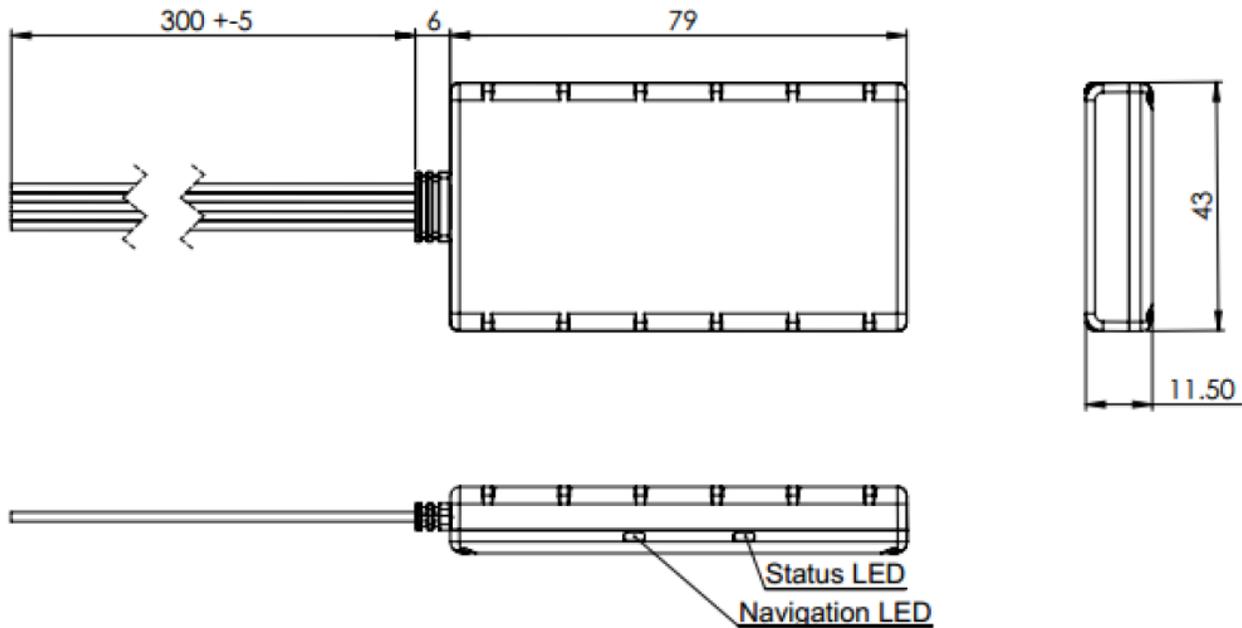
FMB9YX view & dimensions (tolerance ±2mm)
